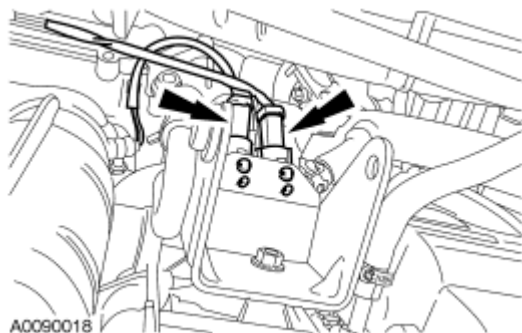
Locating Electrical Connectors At Lower Mount Bracket
